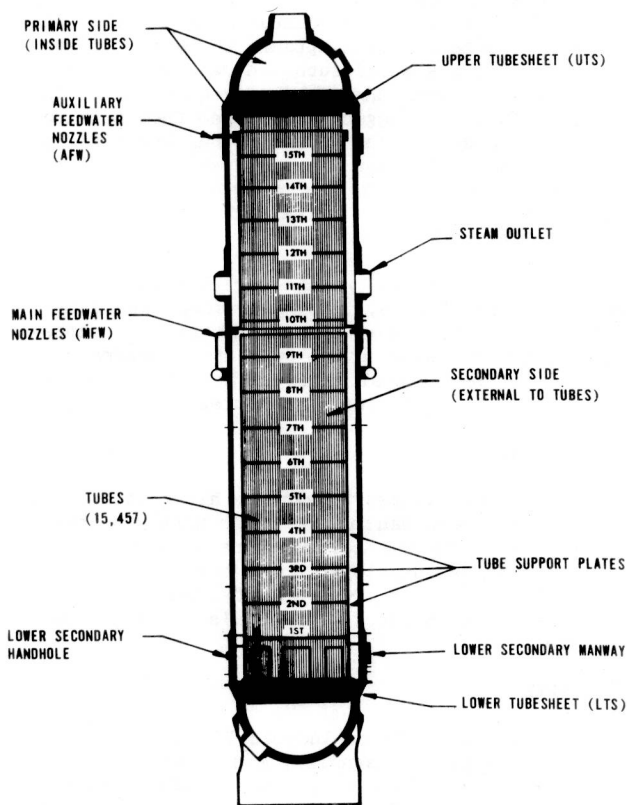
Schematic Drawing of an Once-Through Steam Generator (OTSG)
